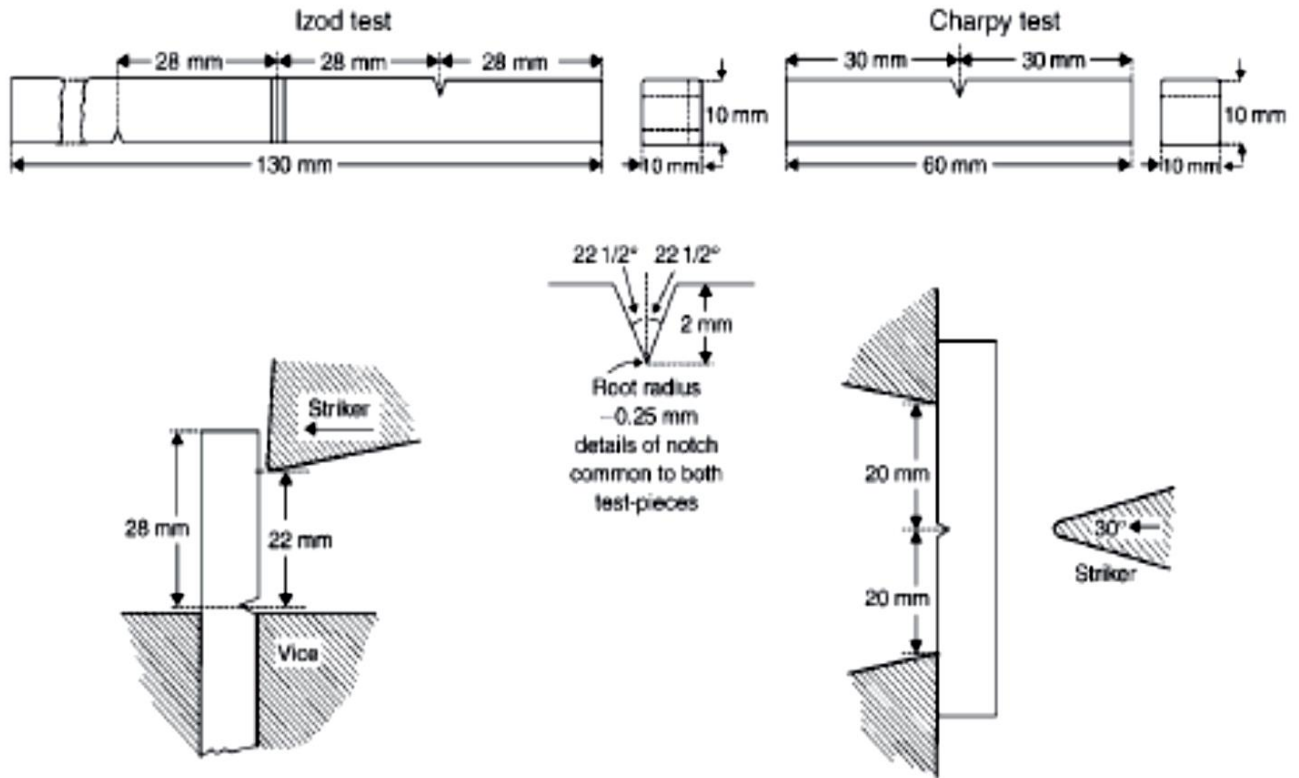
Details of standard test-pieces used in both the Izod and Charpy tests.
